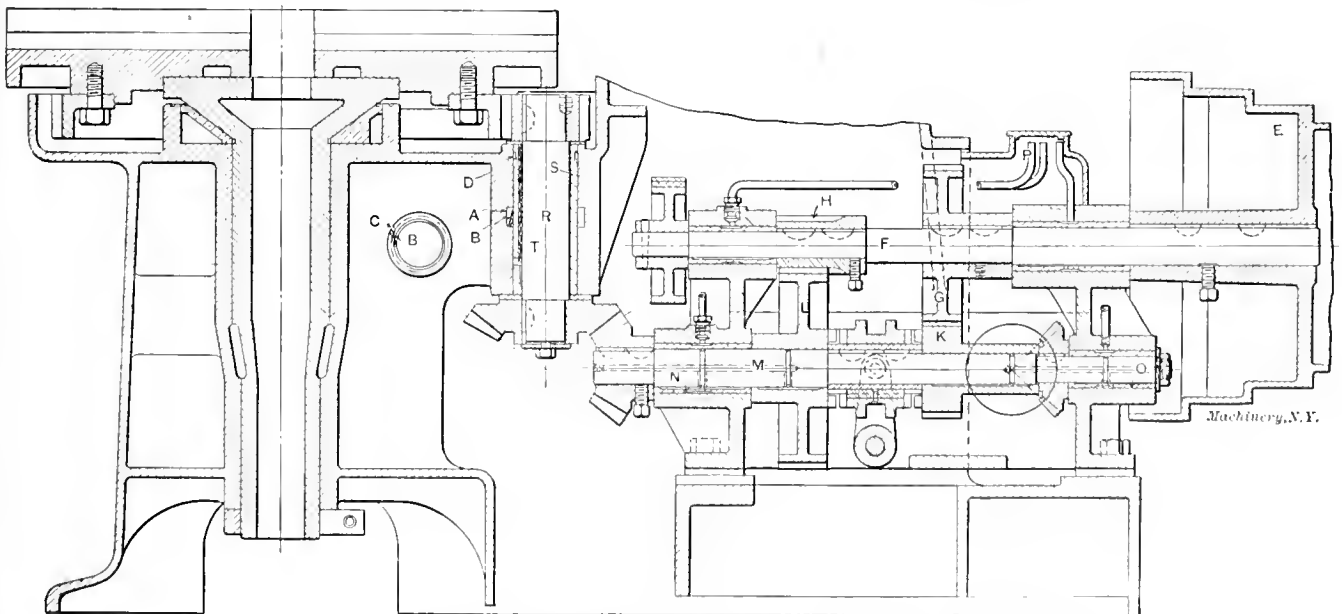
Section through Driving Mechanism of Colburn Vertical Boring Mill
